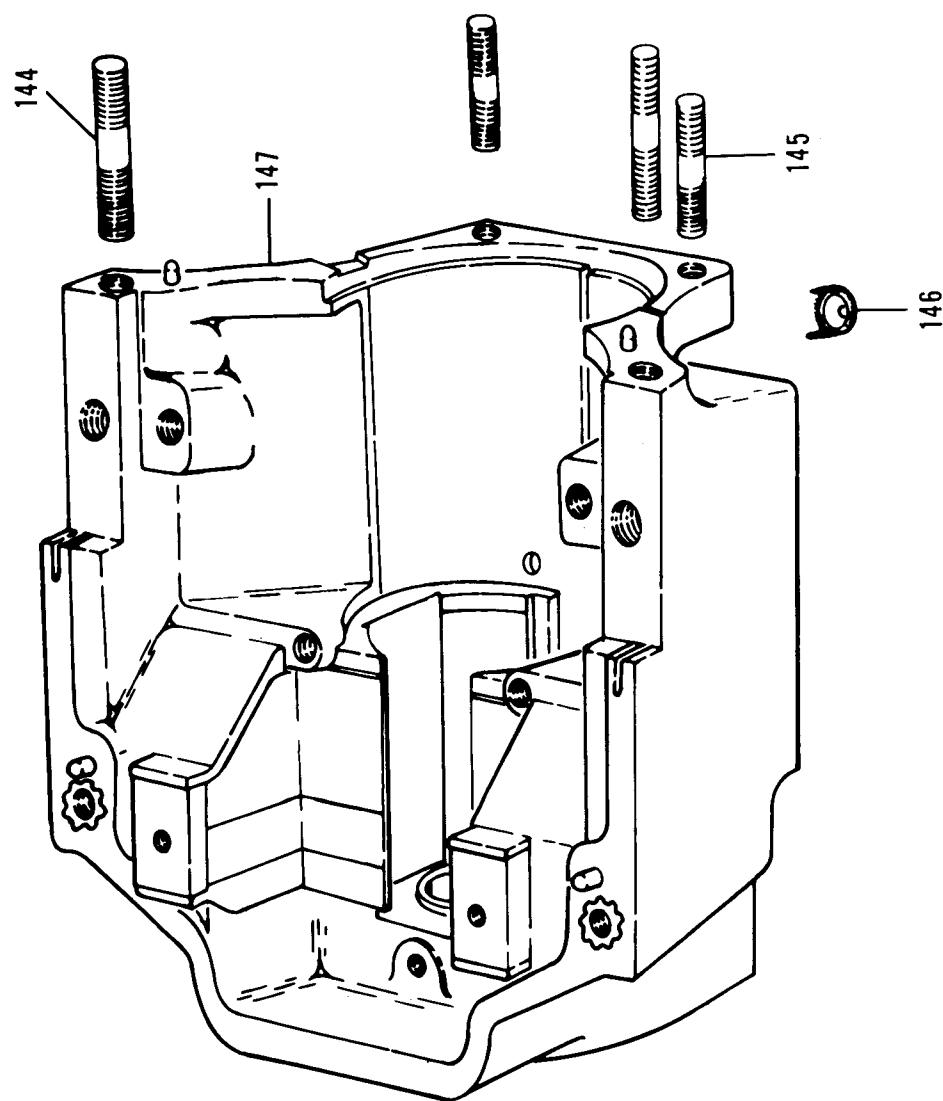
Magneto, Ignition (Housing Assembly, Distributor) (Sheet 10 of 10)
